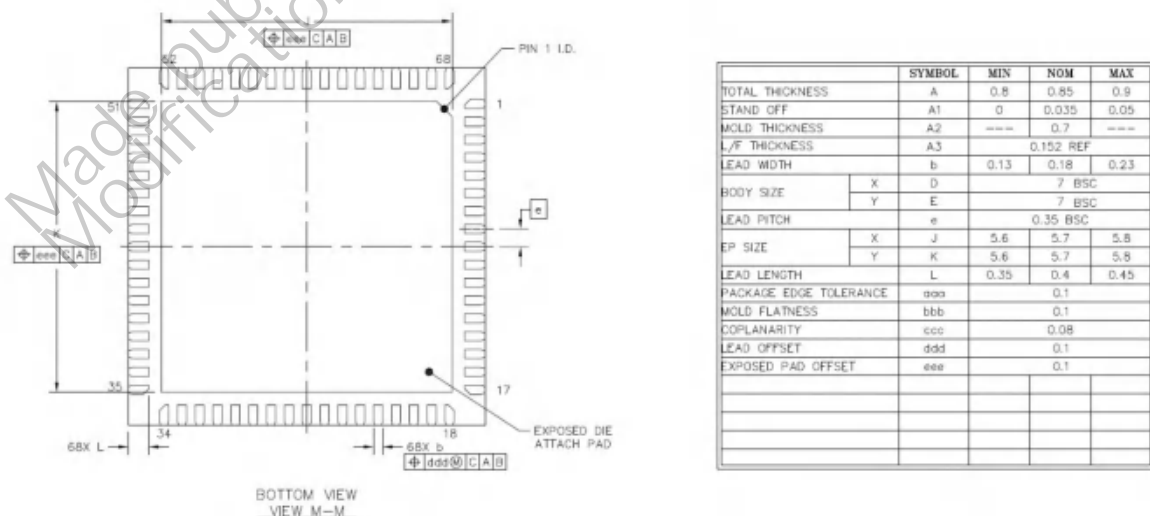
CV180ZB/CV1800B/CV1801B package dimensions, bottom view
